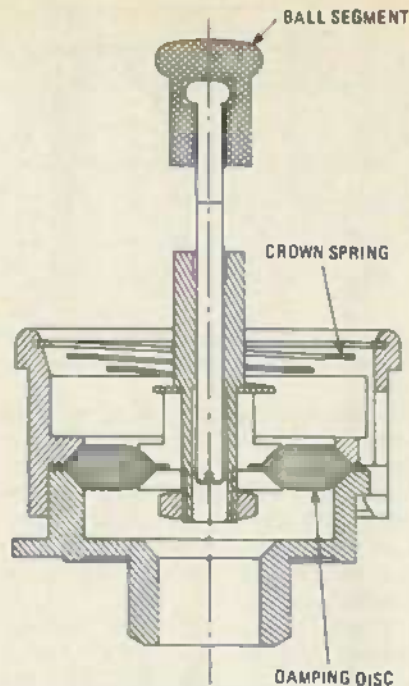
CROSS-SECTION view of the ball-segment mounting arrangement used by Thorens.
